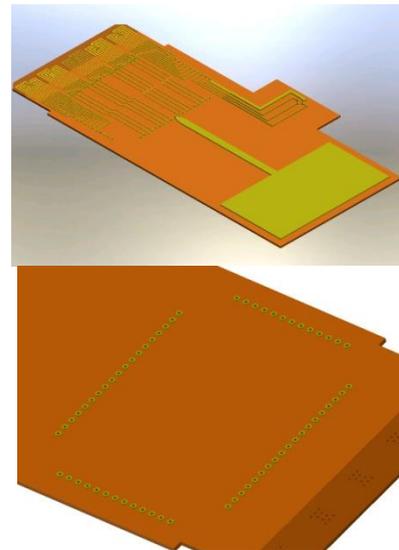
ILLUSTRATION THE TOP AND BOTTOM SIDE OF THE FLEX CABLE.
